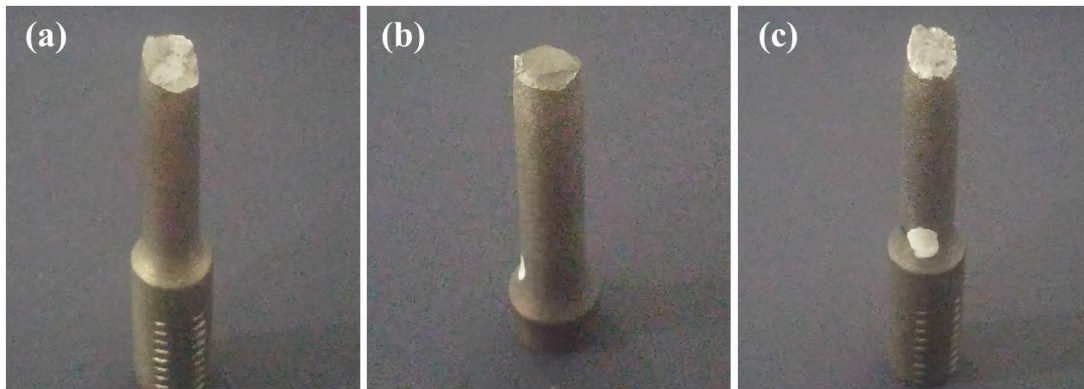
31: Photos of macro fracture surface of dumbbell shaped SLM+HIPped tensile test; (a) as-received, (b) THP-4 stepped, (c) THP-2 stepped specimens.
